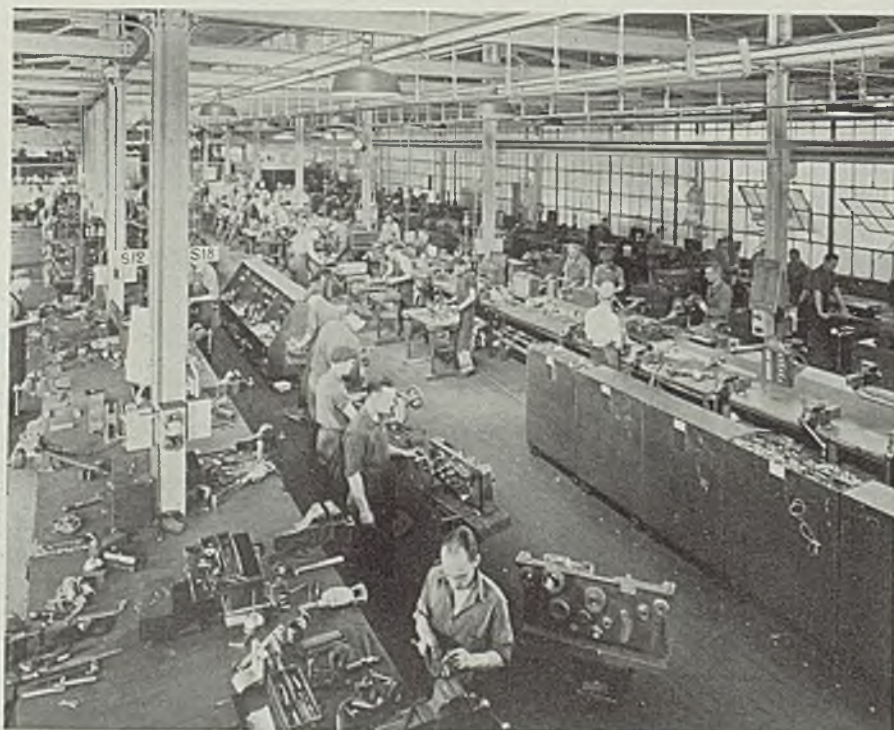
In this room, aprons, gear boxes, compound rests and other similar units are assembled
